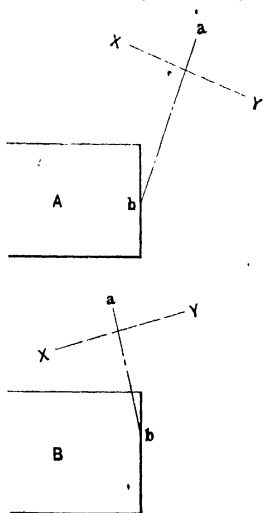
Diagram showing disposition of tool with respect to work-piece.
